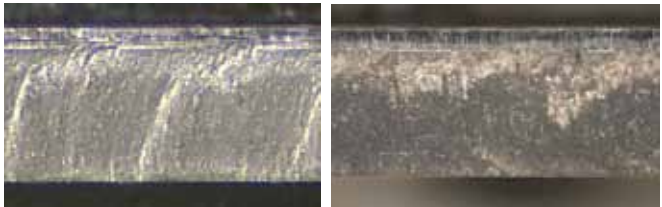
Sheet edge appearance for Docol 1400M, t=2 mm with different cutting conditions. The left image indicate that cutting clearance and/or shearing angle is too large. The right image indicate that the cutting conditions are OK.
